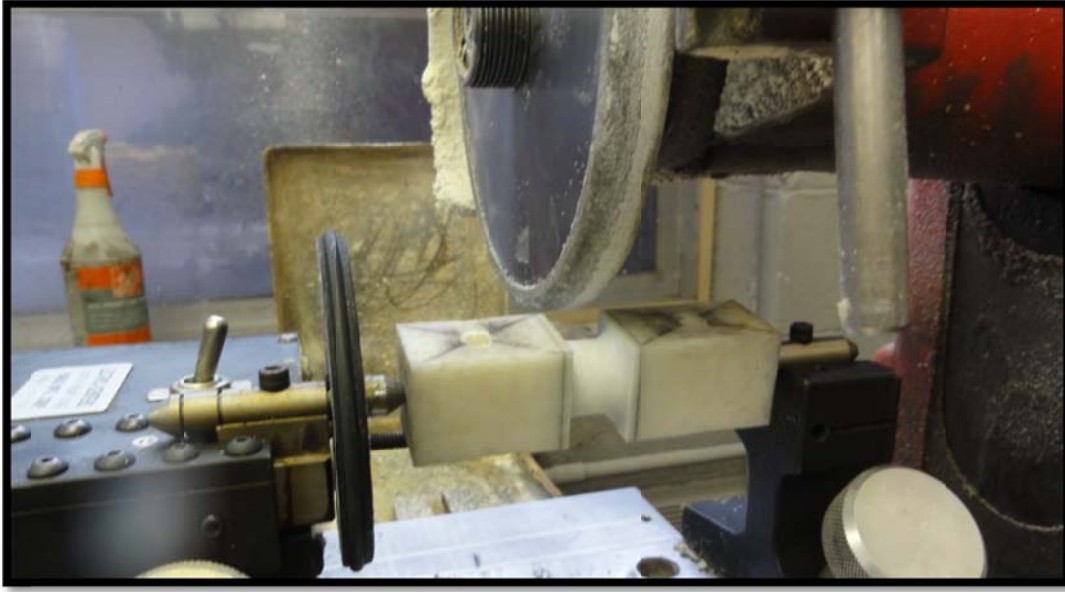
Spooling of Out-of-Plane Tension Specimens
